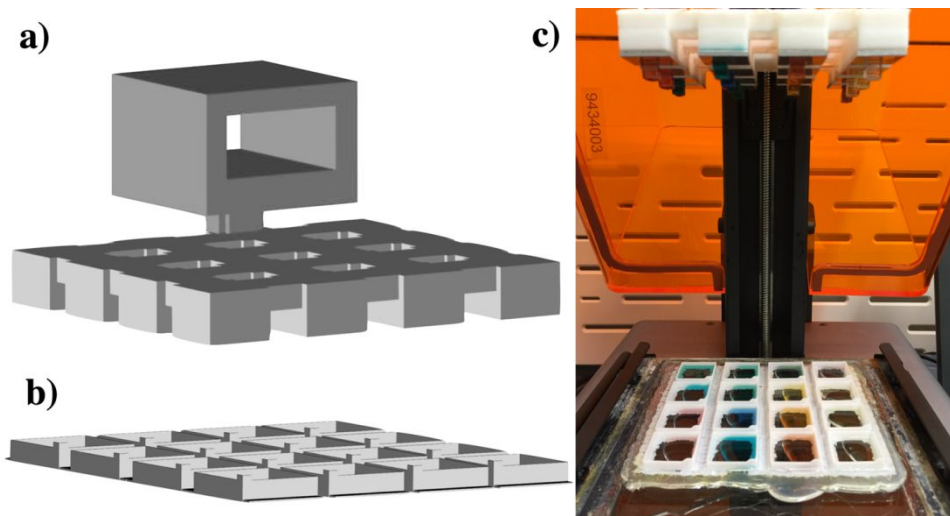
STL design of a) build platform, b) resin tanks and c) complete 4×4 set up for high throughput block (HTB) adaptor.
